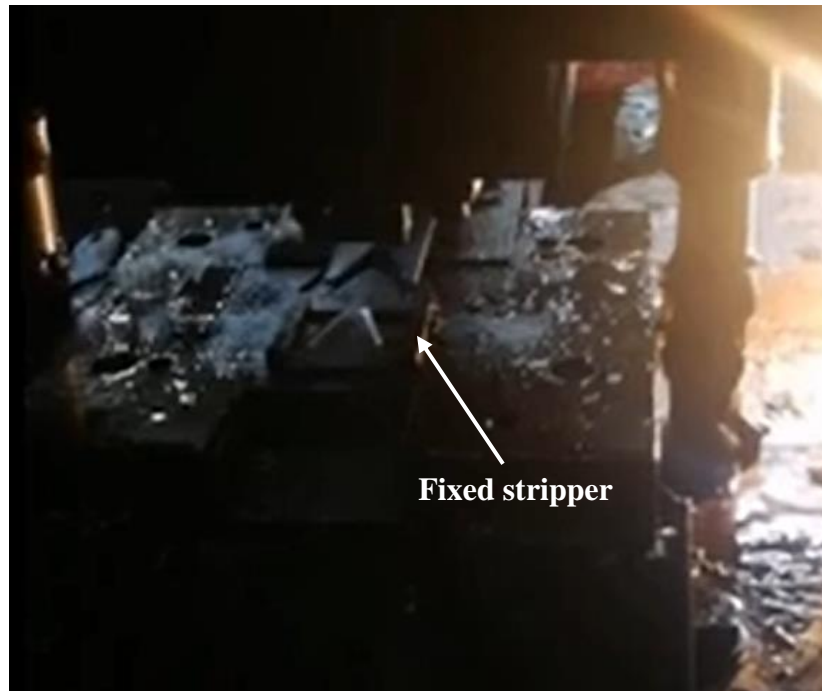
Rear view of Greenly Machinery combine harvester blade serrated edge forging
